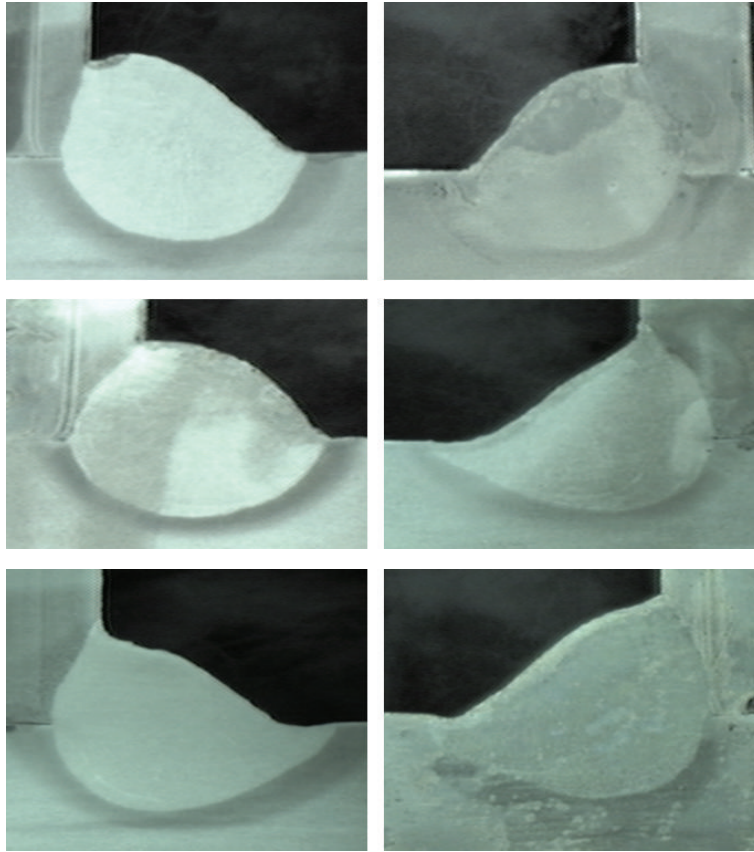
Some examples of macrophotographs of weld bead.
